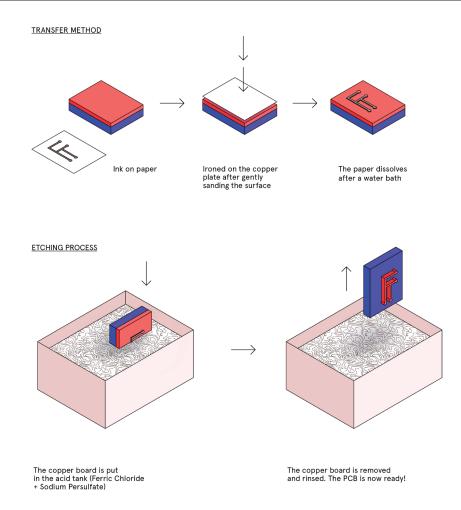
The subtractive method of etching a printed circuit board (our drawings)
